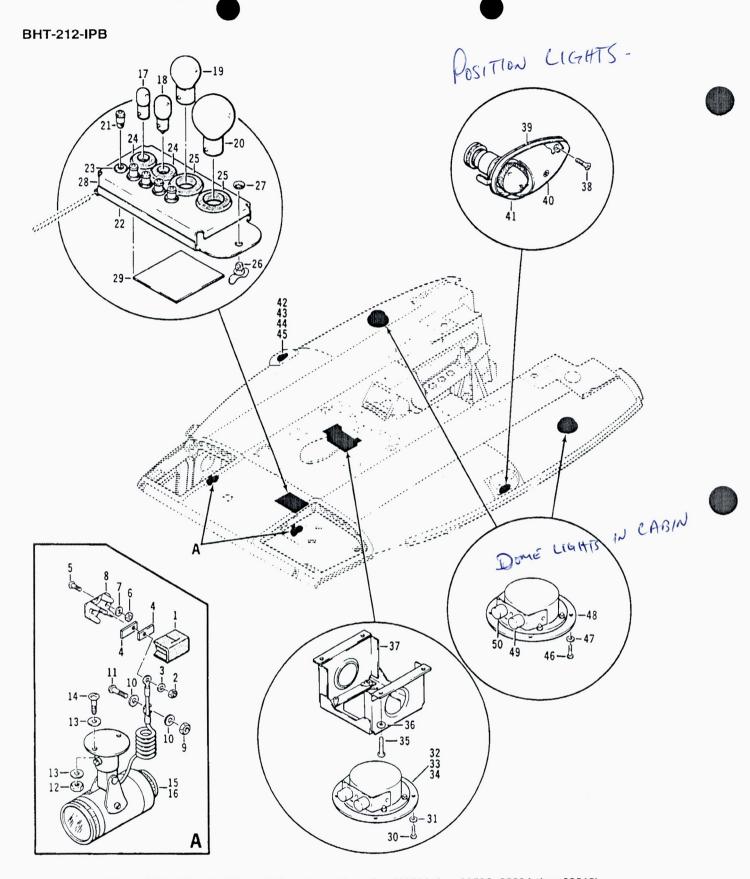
Electrical installation, forward section (30504 thru 30596, 30604 thru 30610)
